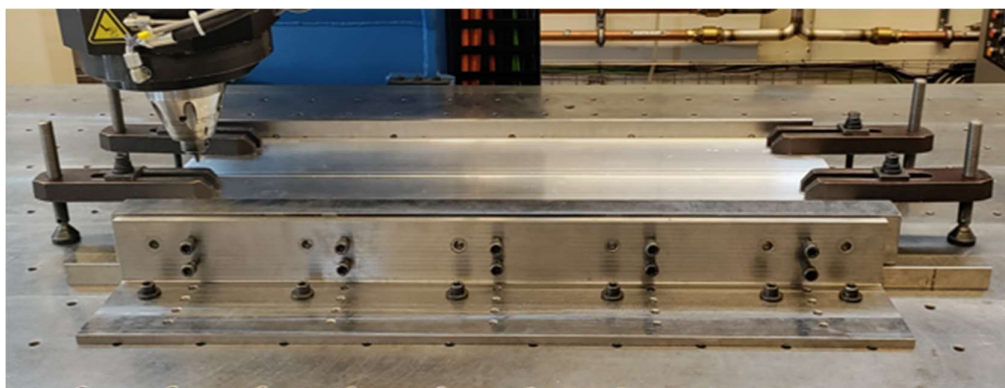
Fixture setup for welding 1-meter length profiles
